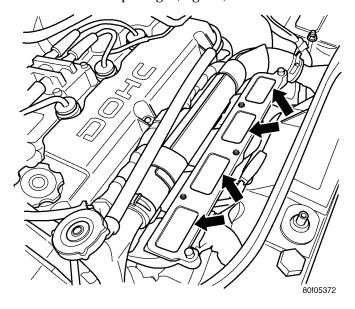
LOWER INTAKE MANIFOLD - 2.4L TURBO
